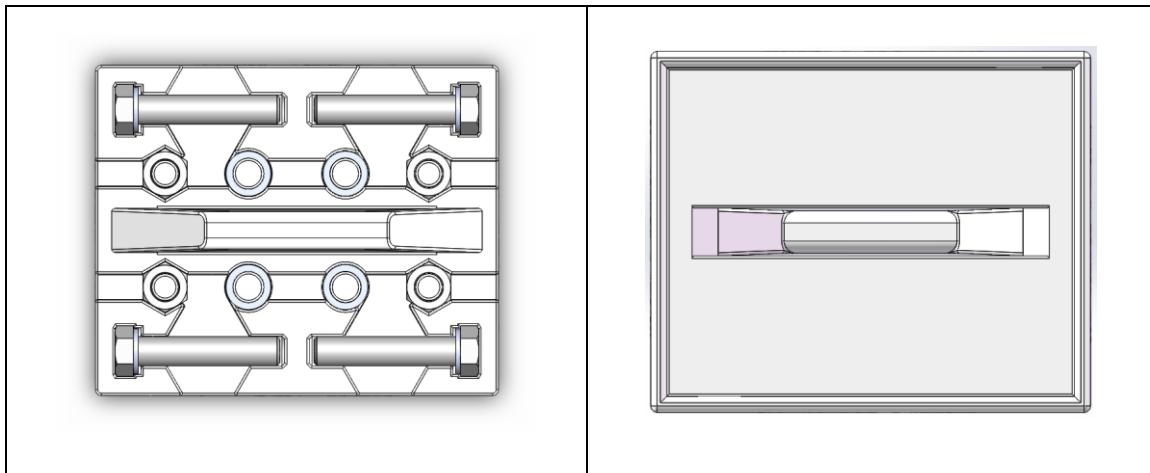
Top view (left) and bottom view (right) of the steering gear hardware fixture [66].
